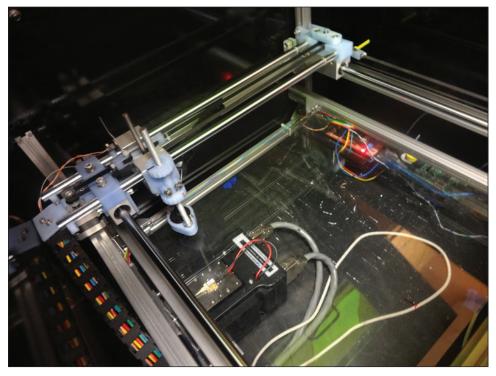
An open source polymer laser welding system composed of 3D-printed parts and controlled with open source electronics (Laureto et al. 2017). This system is used to make novel heat exchangers with additive manufacturing of polymer sheets.
